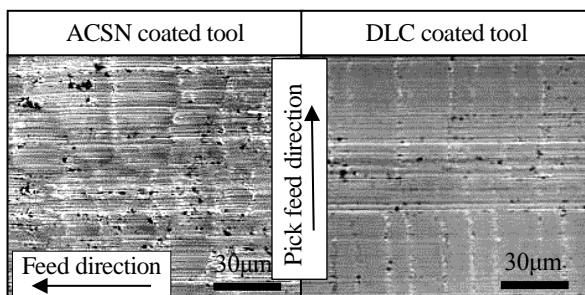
Comparison of machined surface with ACSN coated tool and DLC coated tool on cutting length 25m.
